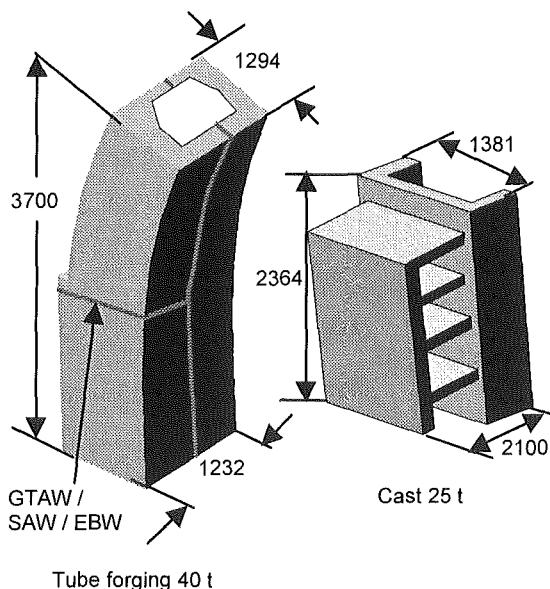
Full size mock-ups for the ITER full size coil casing. Model 1 (forging) and Model 2 (casting).
